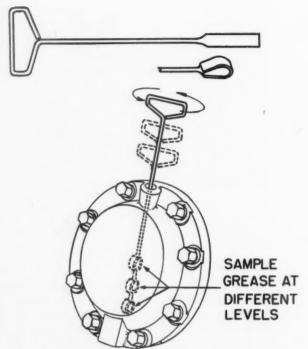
A probe is a handy way of checking the grease in a bearing without removing the cap
